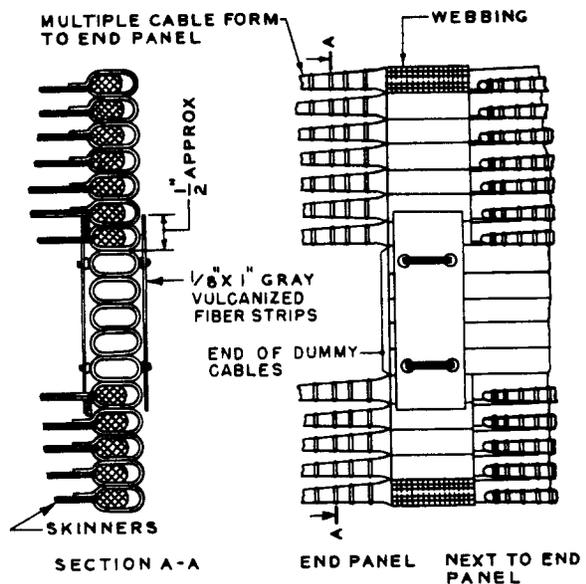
Fastening Dummy Cables In End Panels Of Switchboards
